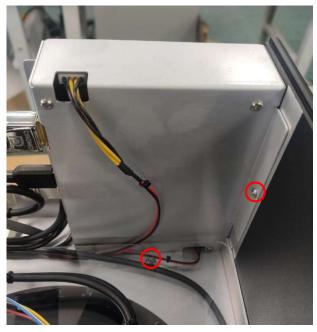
Internal PC Fixings: 1x Flange Nut (5.5mm Driver) & 1x (T10 Torx) Screw.
